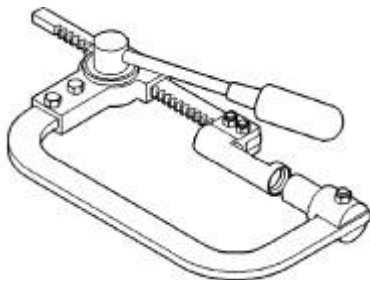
VALVE SPRING COMPRESSOR C-3422CF
